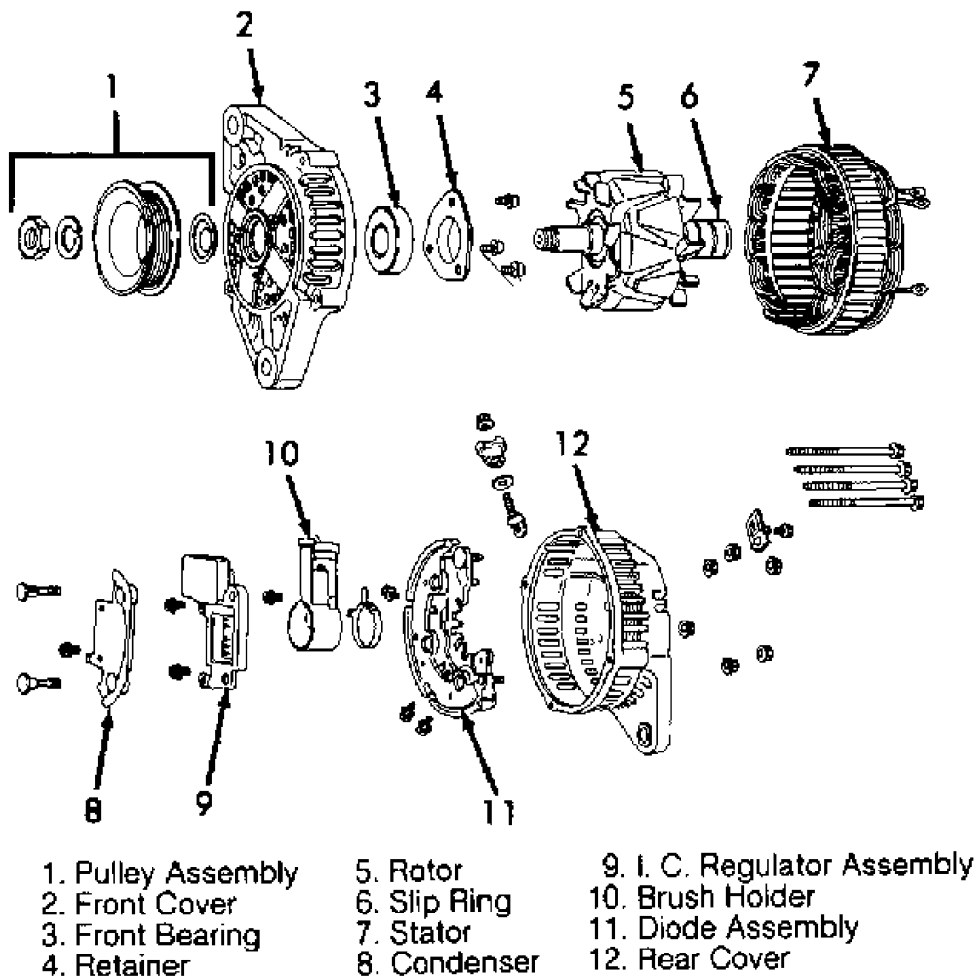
Exploded View Of Alternator (G20 - Hitachi)
